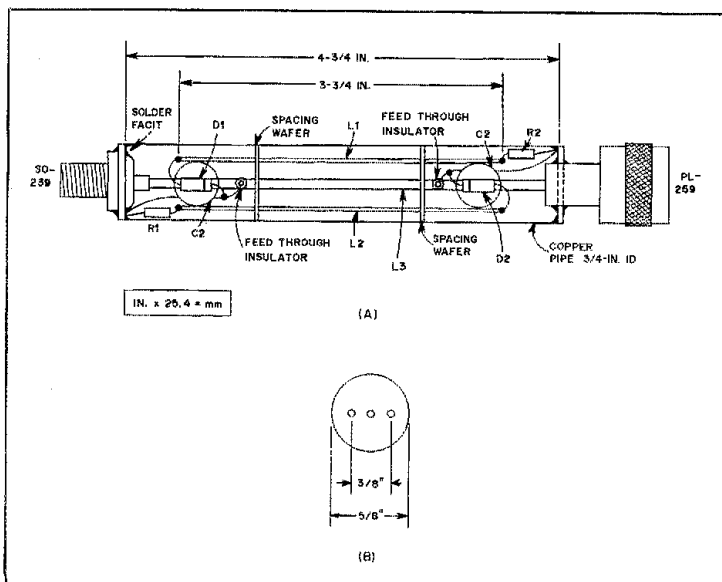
At A, a cutaway view of the pickup unit constructed from a piece of copper pipe. The insulating wafers used to support the conductors are cut to the dimensions shown at B.
